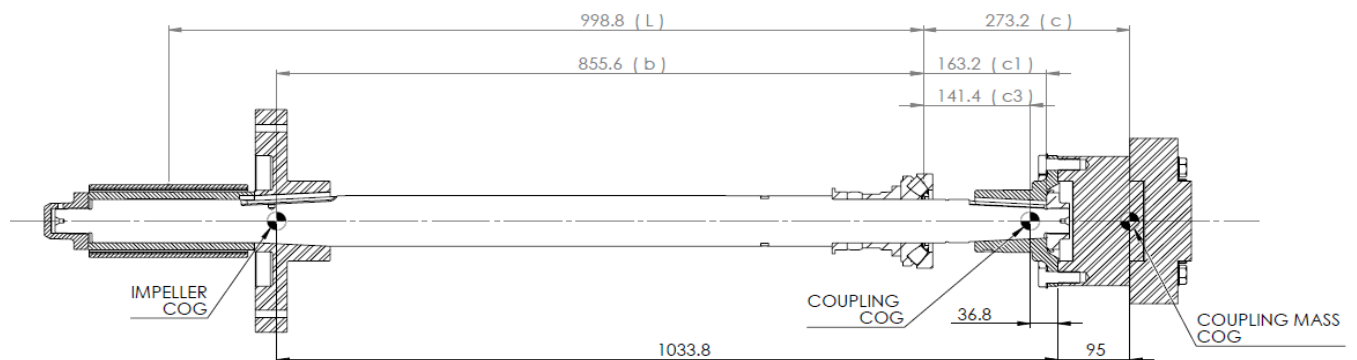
Thrust Bearing Modelling Options: Case 1 (Effective centre in thrust bearing roller plane)
